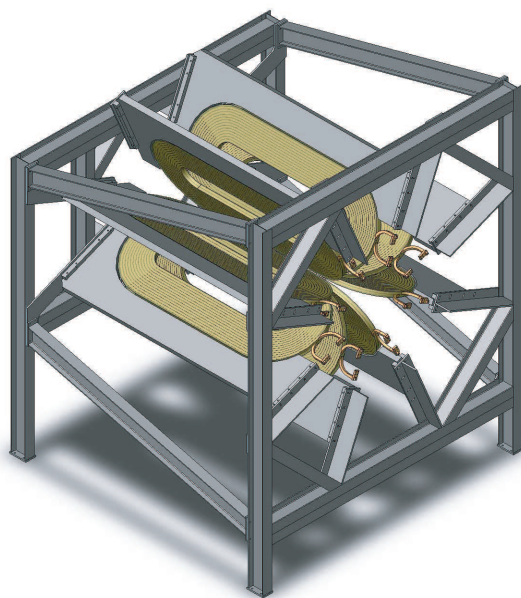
Isometric view of the final QTOR Toroid Assembly.
